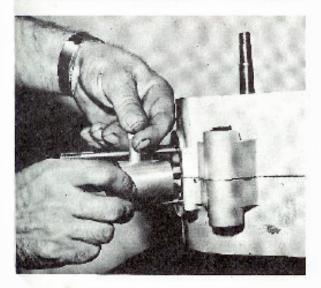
The wrist pin is a slide fit on both the piston and connecting rod. Using a round bar, push the wrist pin through the piston and remove.
